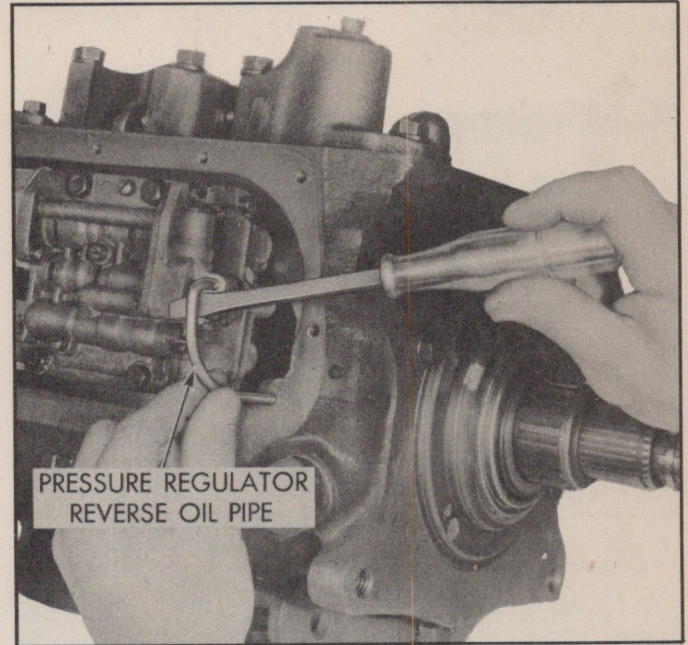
Removing Pressure Regulator Reverse Oil Pipe
